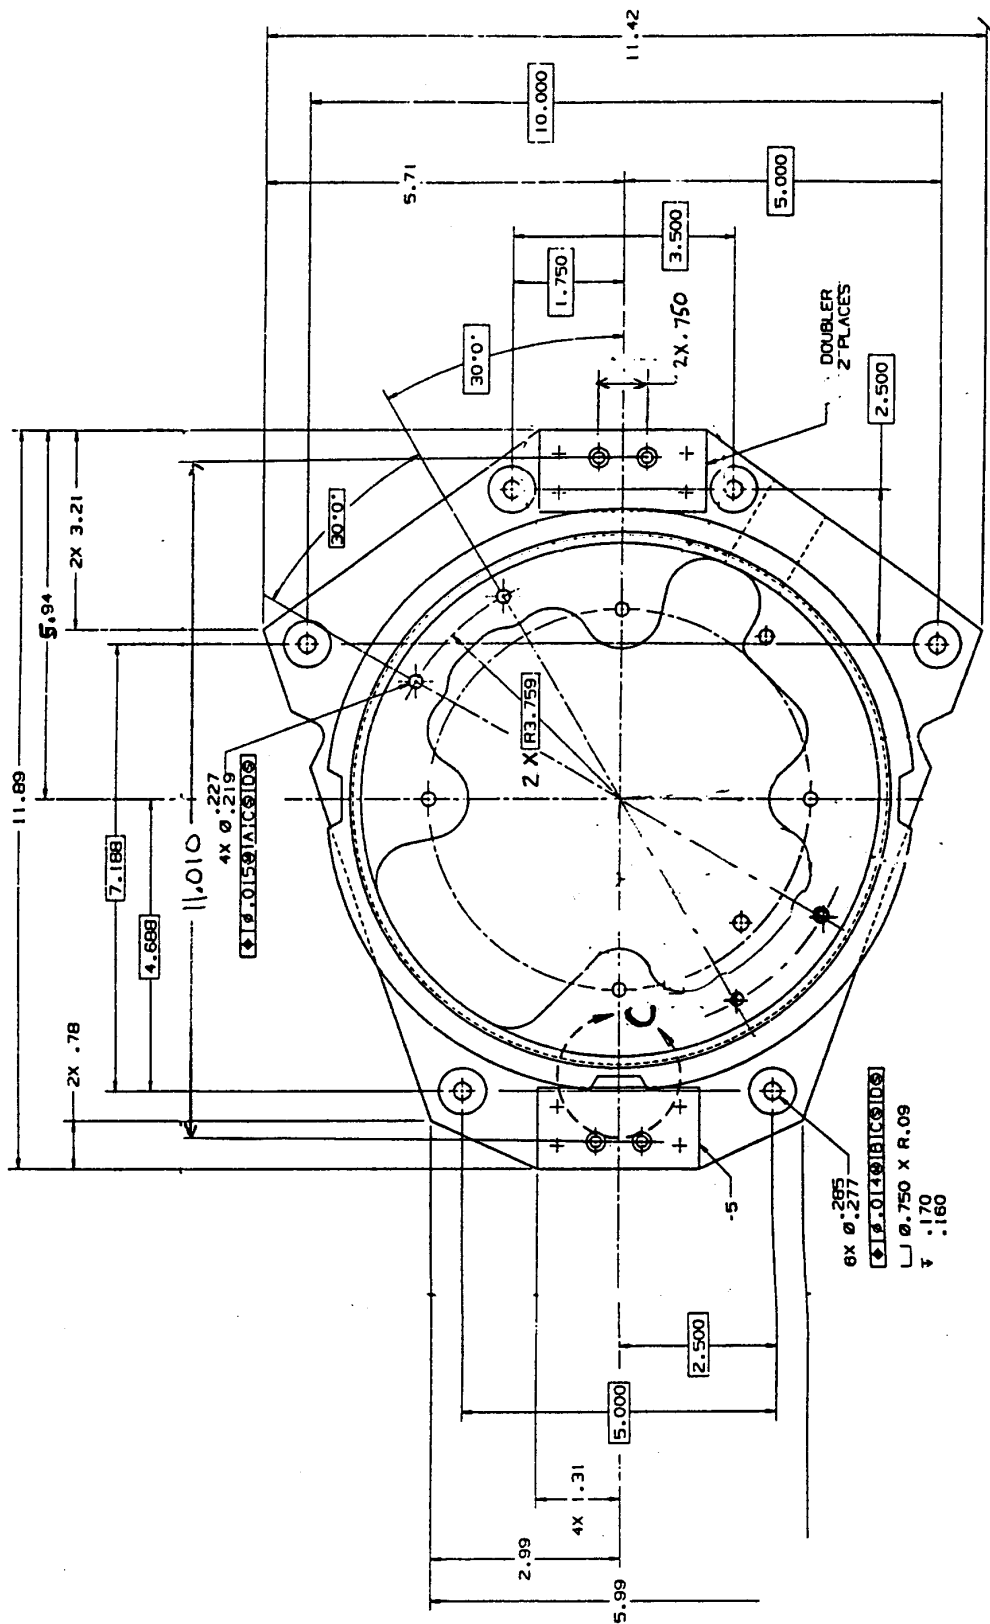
Example of Payload Adapter Assembly for Separating SPs
